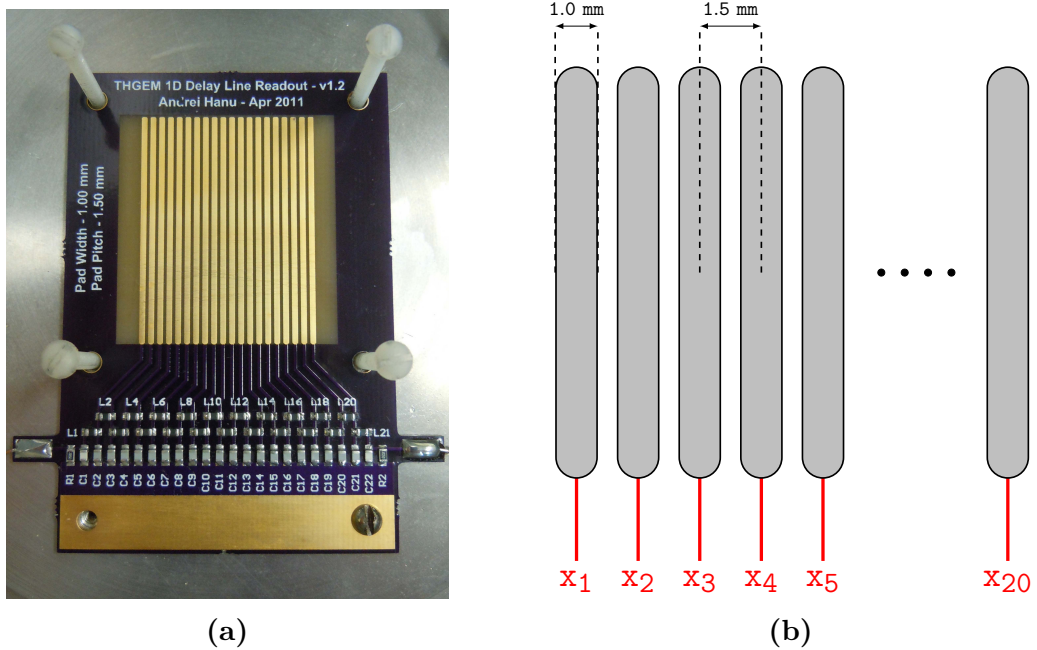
Image of the assembled one-dimensional delay line readout (a) realized on a 2-layer PCB. Illustrated in (b), the sampling electrodes are 1.0 mm wide copper strips with a pitch of 1.5 mm.
